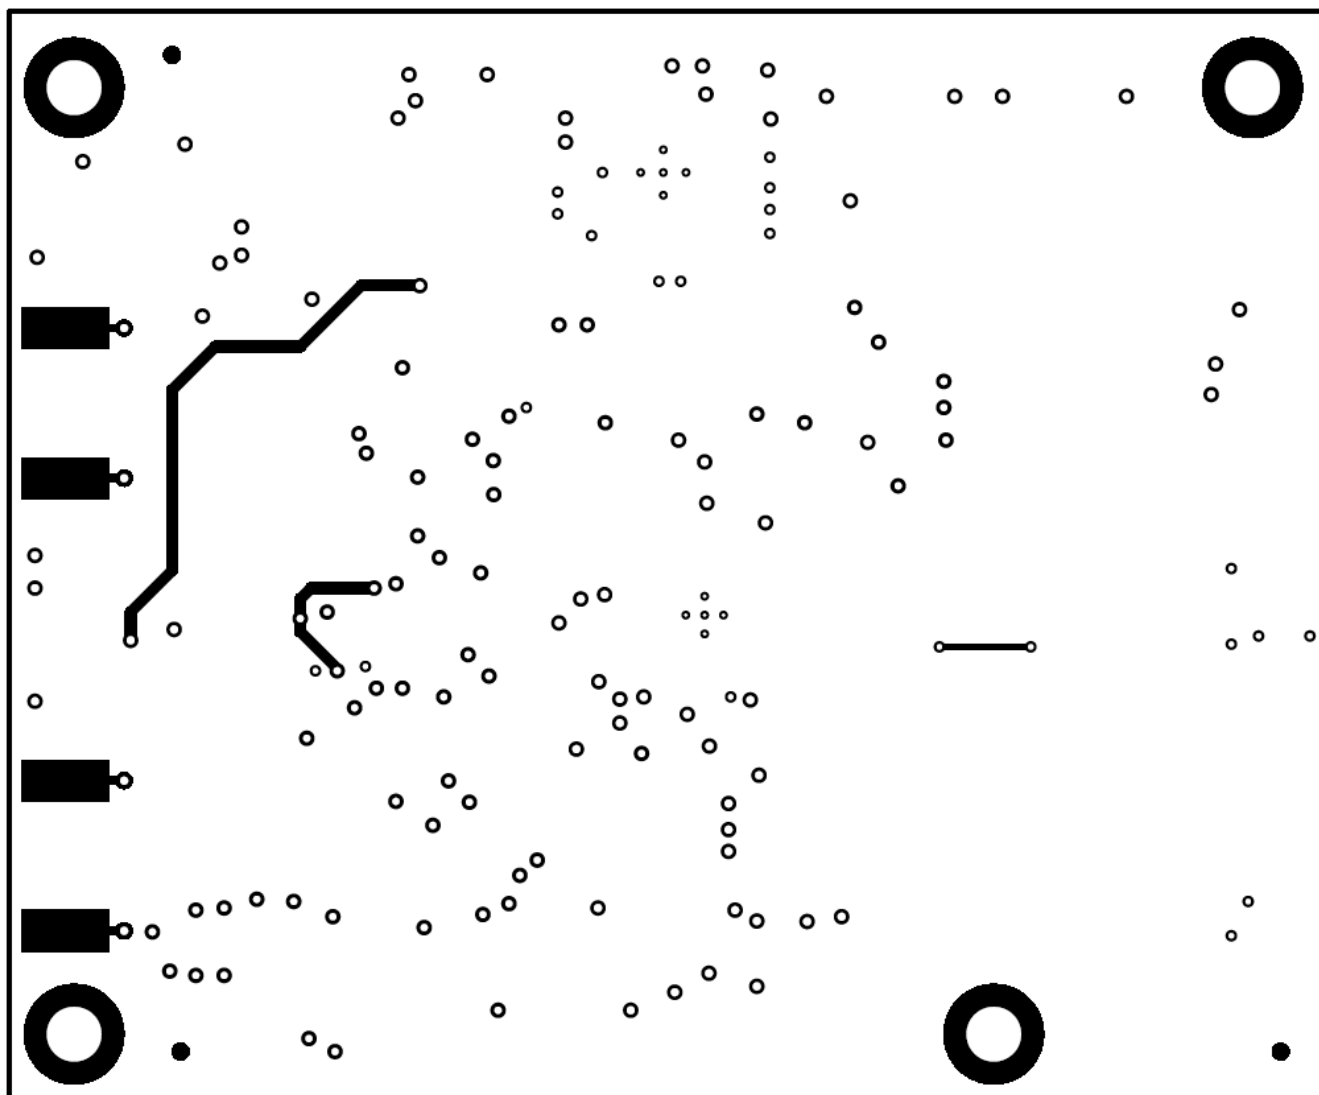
ADS9110EVM PCB Layer 4: Bottom Layer
